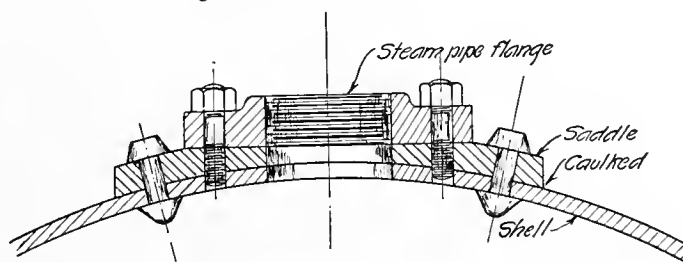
SADDLE BENT TO FIT SHELL AND PLANED TO RECEIVE PIPE FLANGE.
